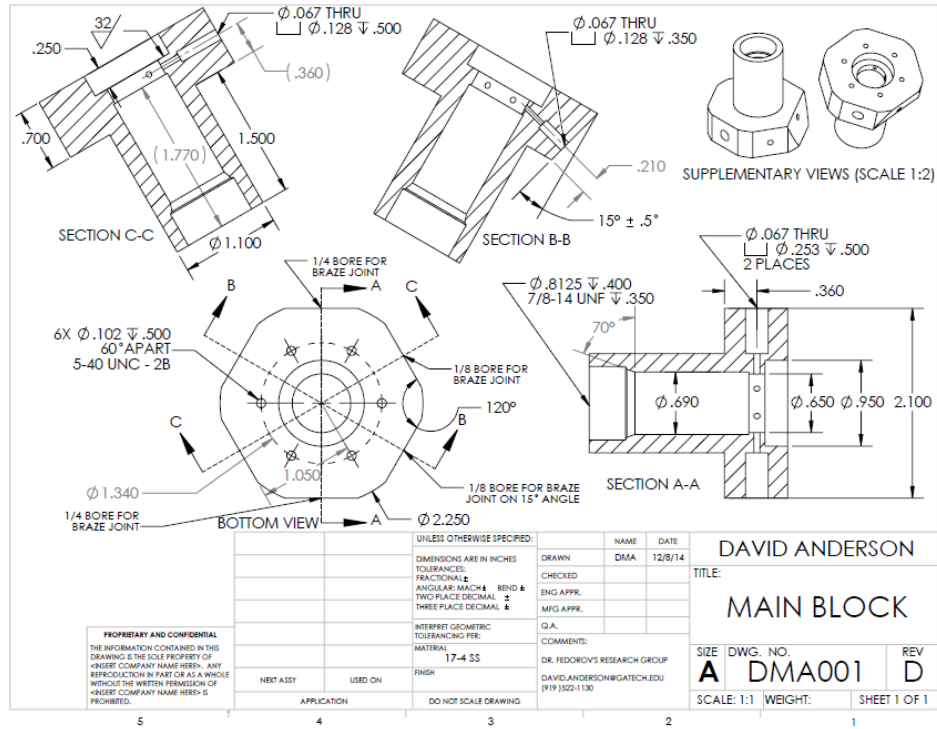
CHAMP-SORB Reactor Block Part Drawing
